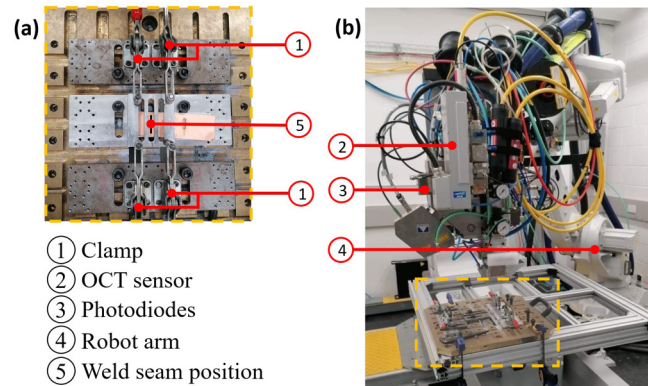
(a) Clamping setup, (b) welding setup with a robot arm and tested sensors.
